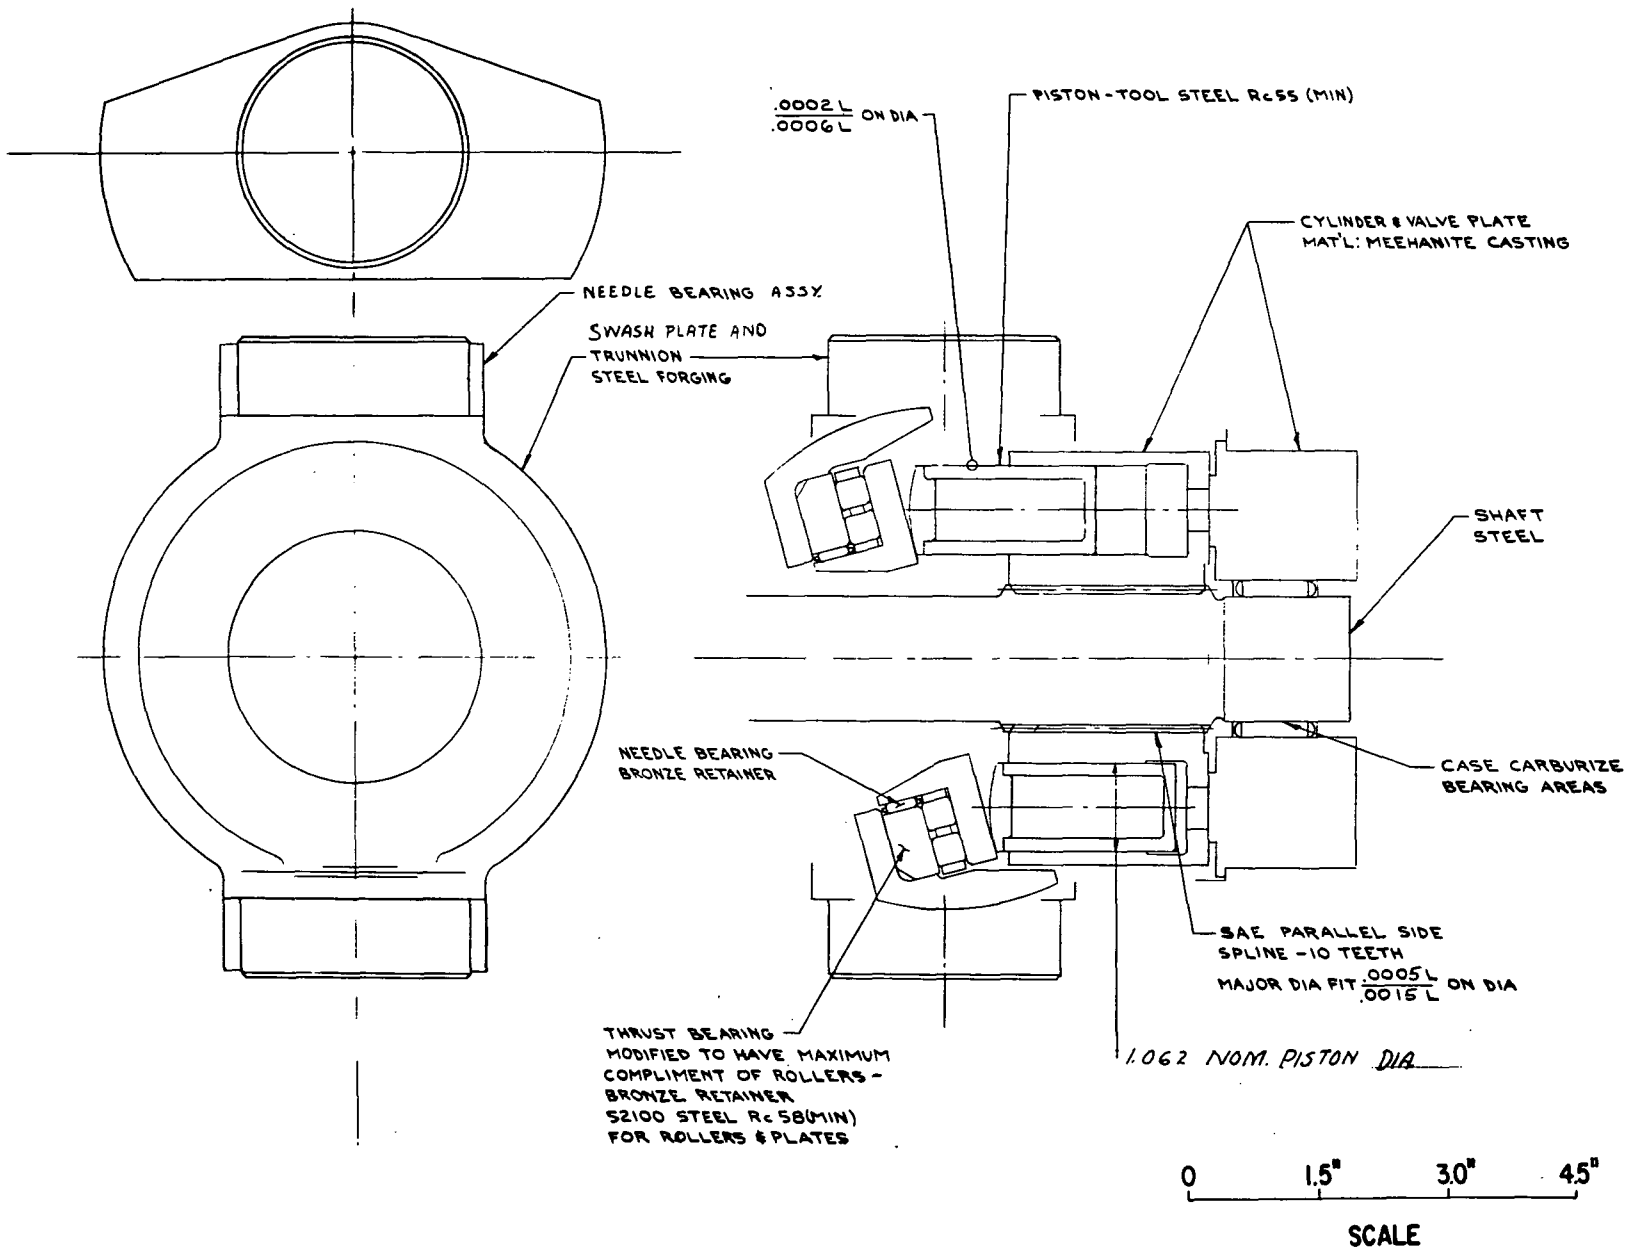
Drawing of High-Density Hydraulic Element (SK-C-4266)
